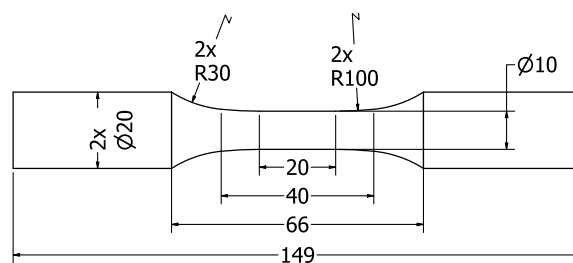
Geometry and dimensions of test bars machined from cylindrical rods extracted from new rail heads.
